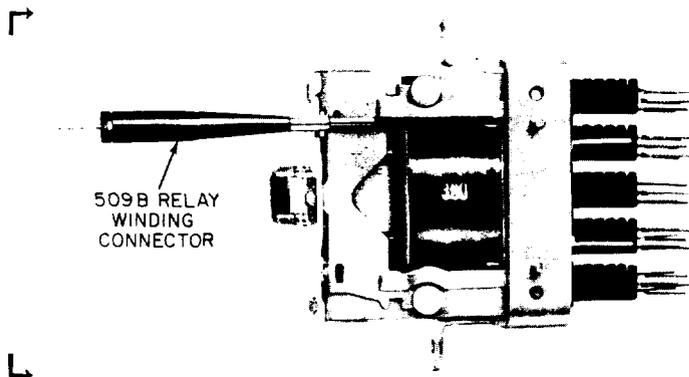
Connecting to Winding Terminal at 286-, 287-, or 288-Type Wire Spring Multicontact Relay (286-Type Shown)
